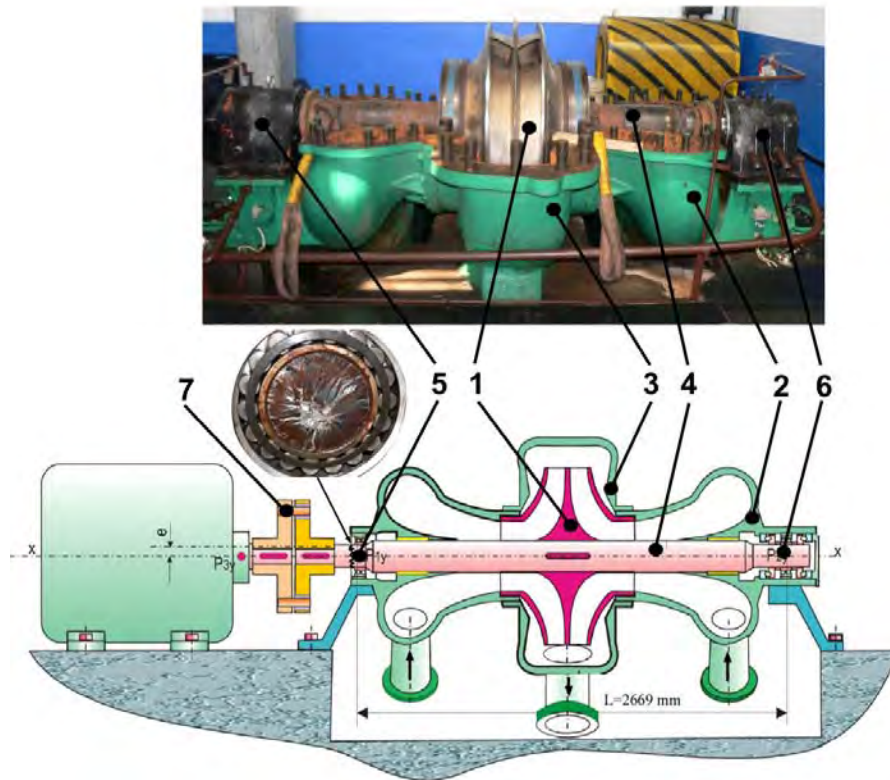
The pump storage view (above) and cross section (below). The pump storage components are the following: (1) impeller, (2) suction elbow, (3) volute, (4) shaft, (5) radial bearing, (6) radial-axial bearing and (7) elastic coupling.
